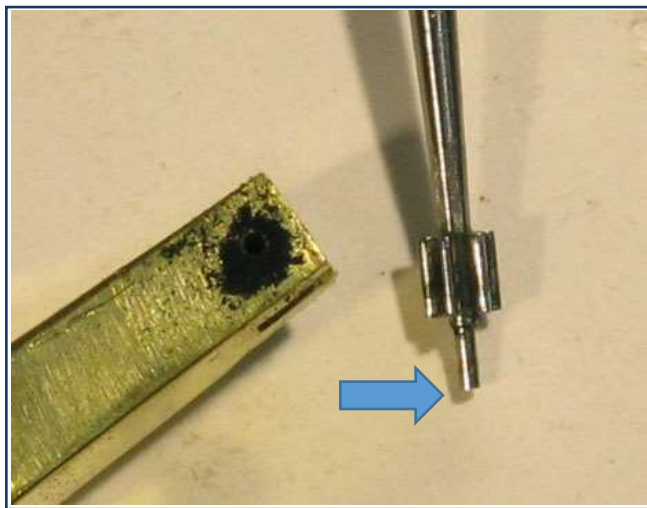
Bottom crownwheel arbor pivot has a flat bottom with sharp edge. This was causing considerable friction, wear and blackening of the pivot
